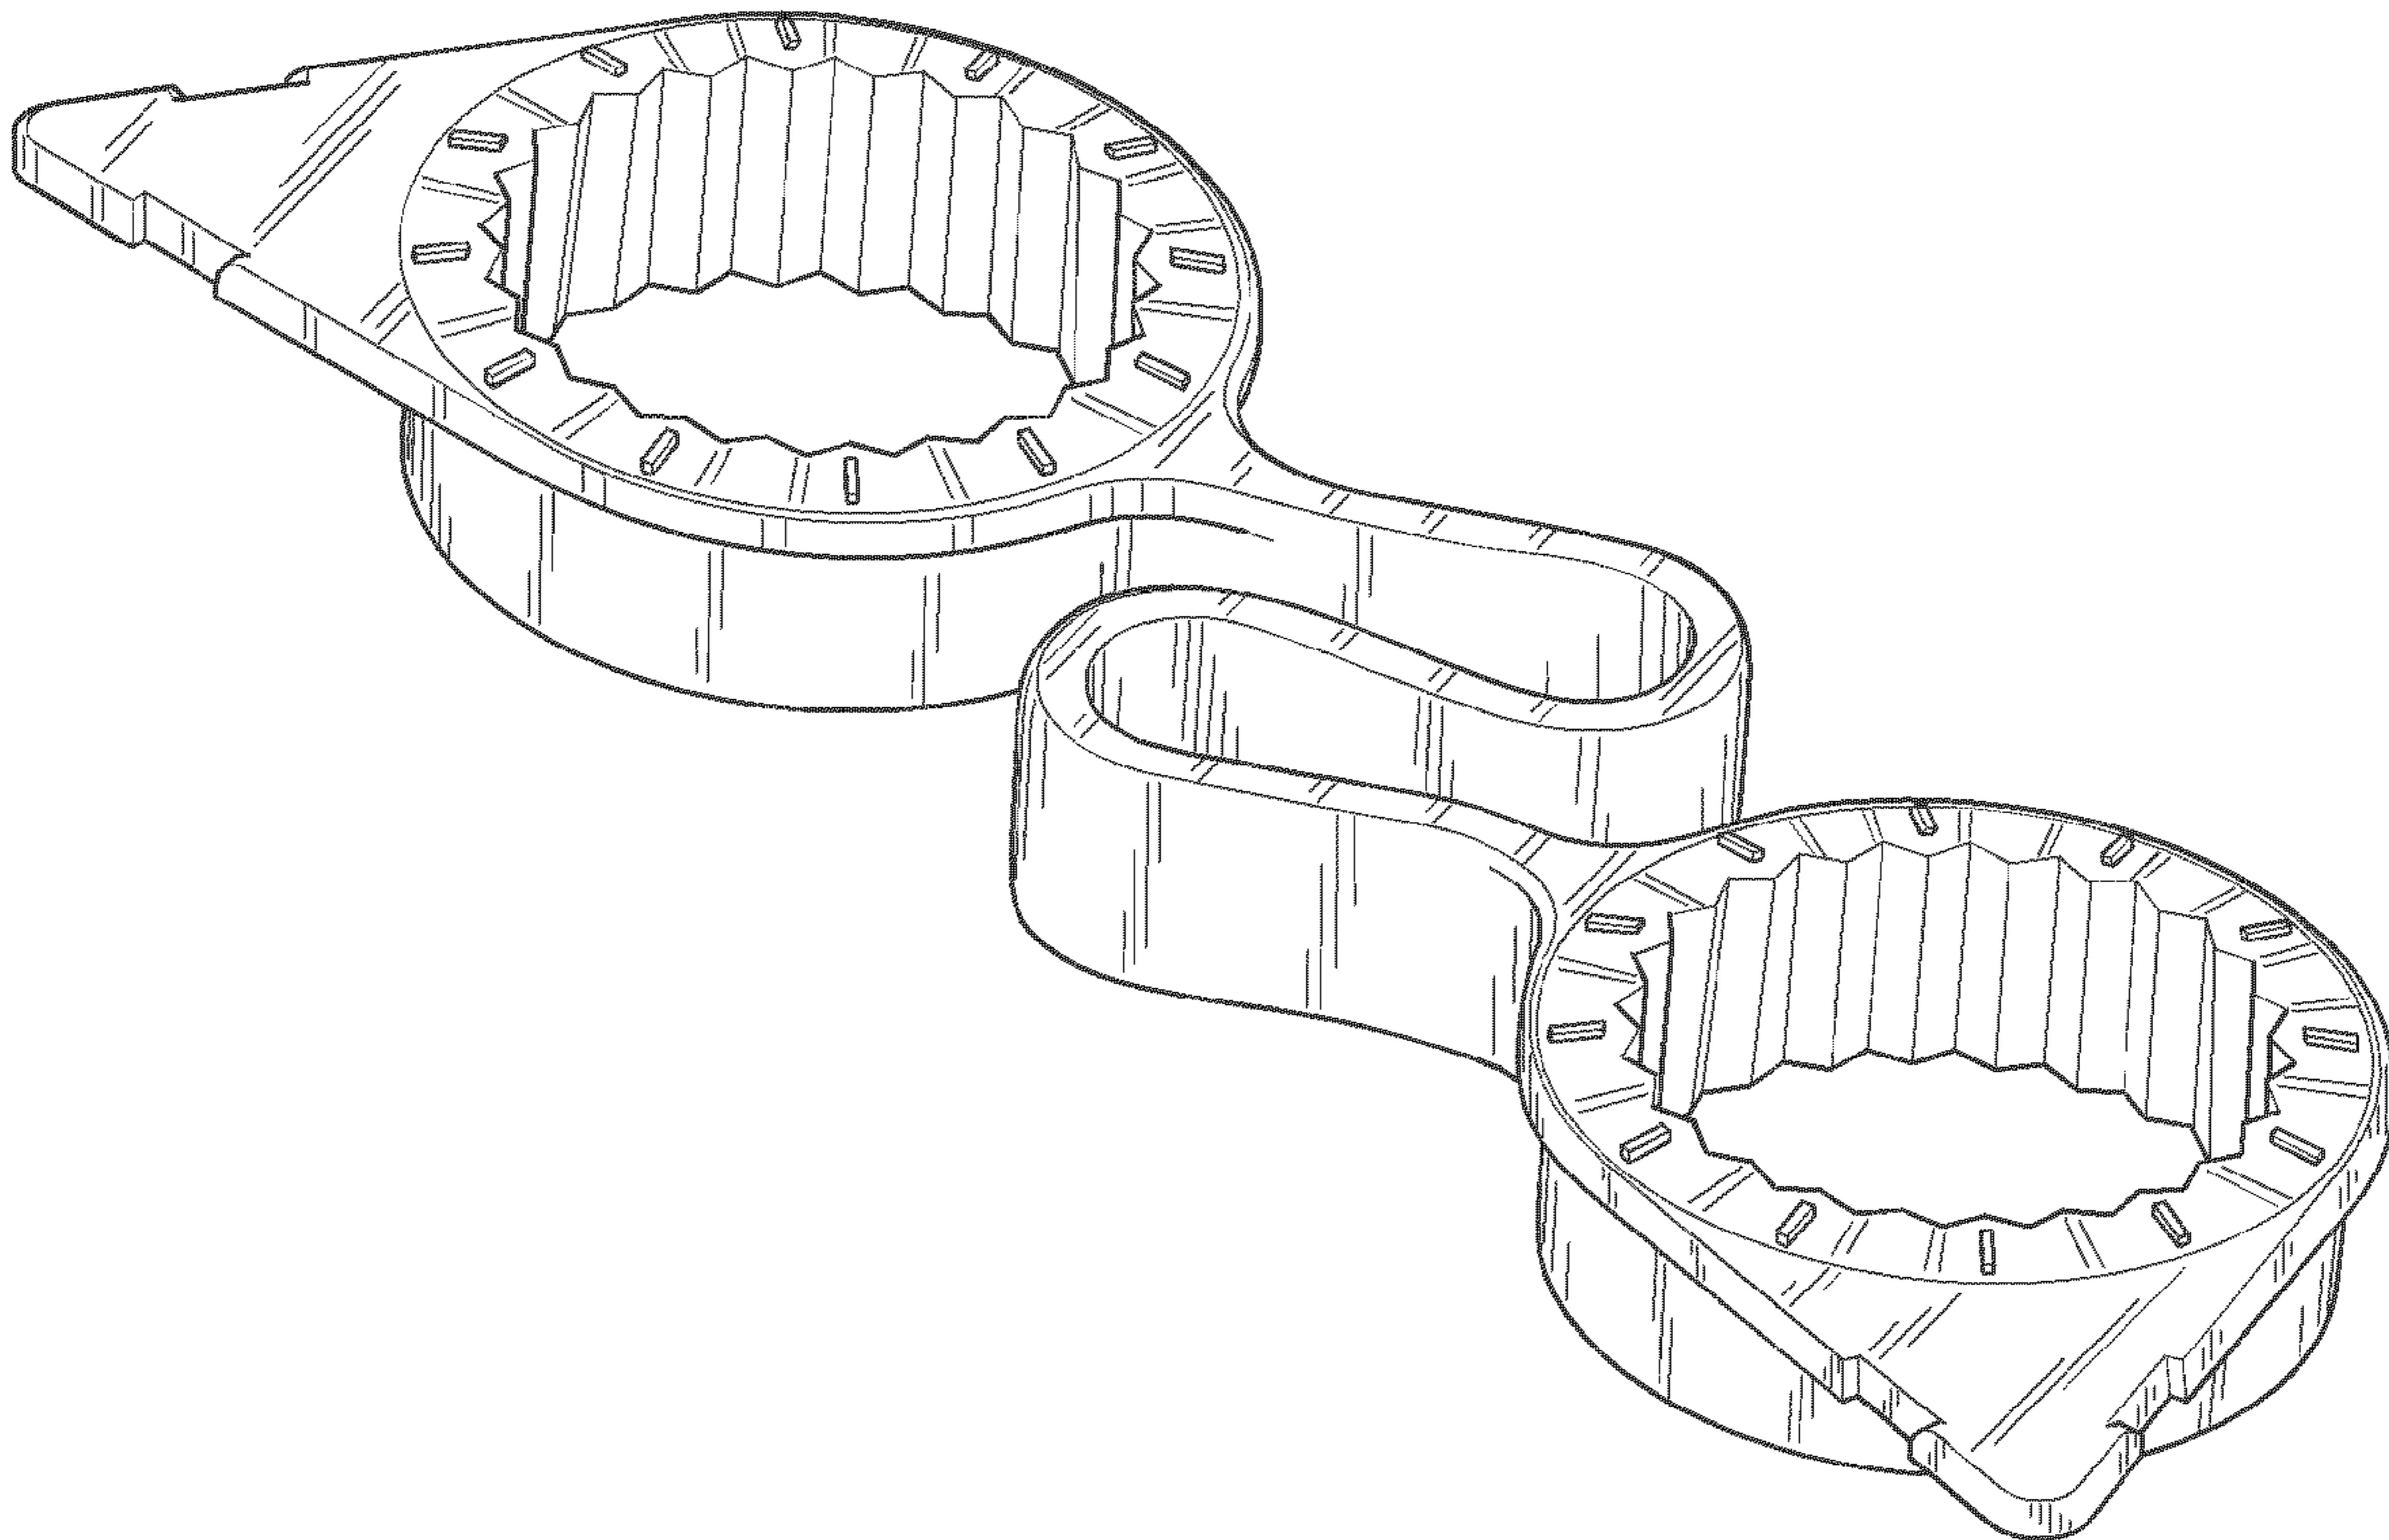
is a top, front and right side perspective view of a loose wheel nut indicator showing the new design;
